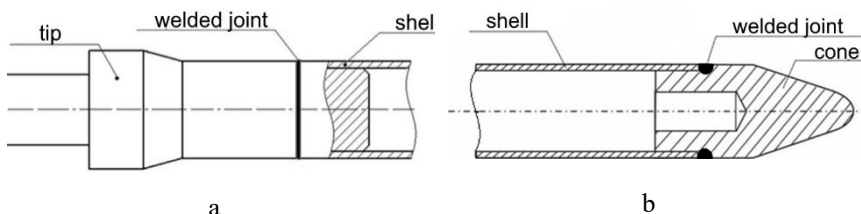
Welded joints of the tip (a) and the cone (b) with the CR shell.
